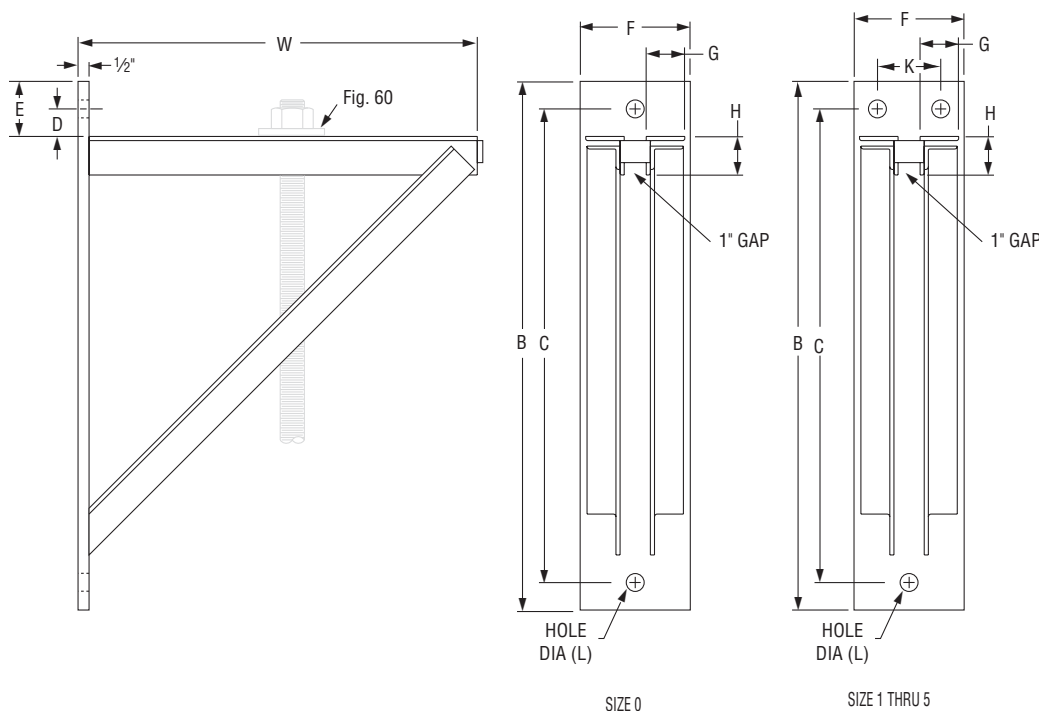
Load (lbs) • Weight (lbs) • Dimensions (in)
